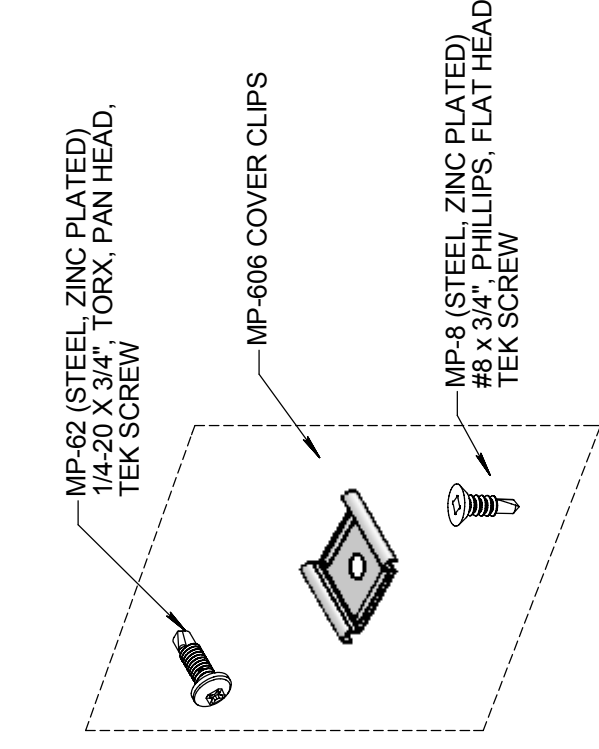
INSTALLATION (EXPLODED VIEW)
